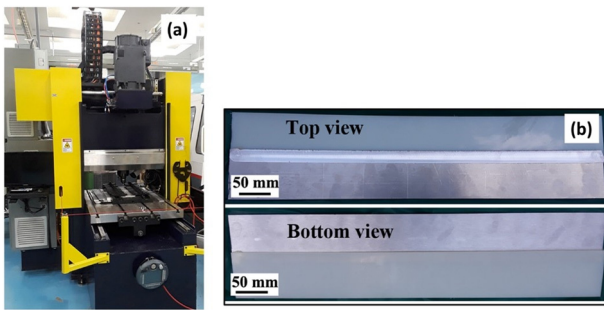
(a) A three-axis friction lap welding machine for joining process development. (b) The surface of a friction lap welding joint of PA and 6061 Al.
